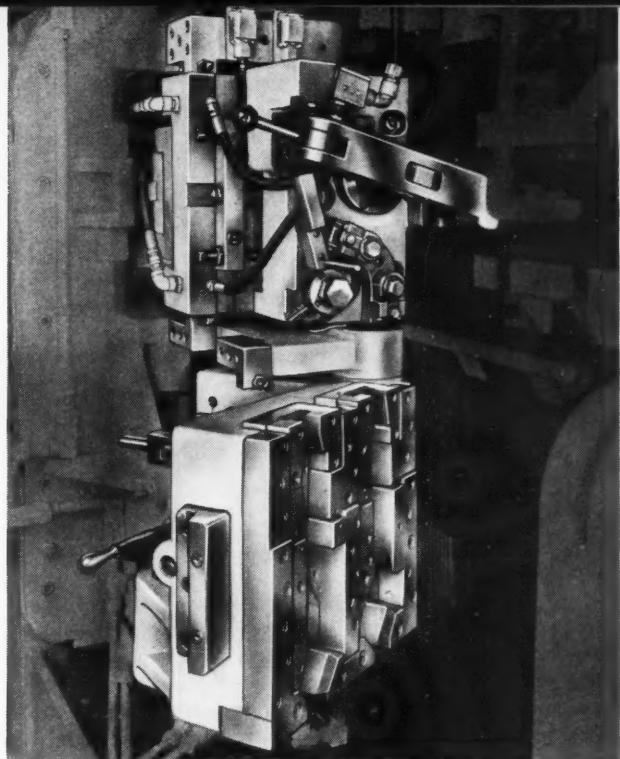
Close-up view of fixtures on machine shown in Fig. 1, with upper fixture in broaching position and lower one in loading position
